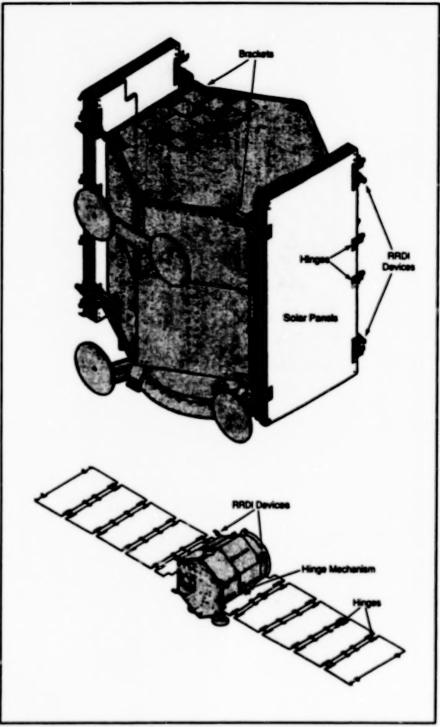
Solar Panels Are Deployed from compact stowage by unfolding them at hinged edges.
